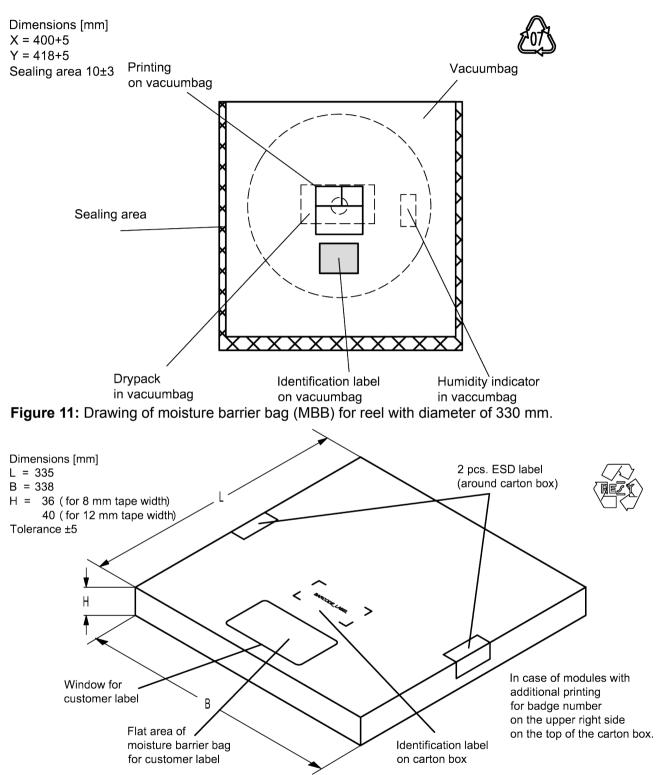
Drawing of folding box for reel with diameter of 330 mm.
